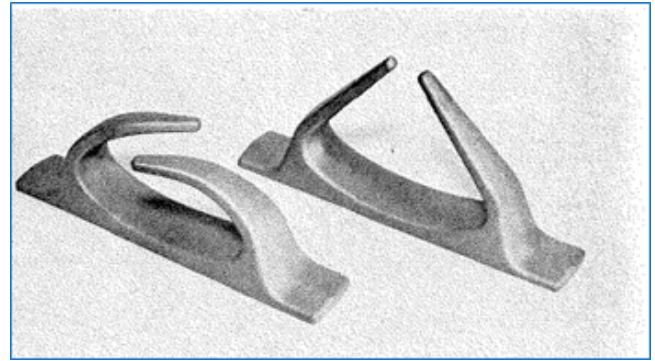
Ductility demonstration of HPDC 316. This component is diecast with straight arms, and cold bending is carried out as a subsequent operation.⁴
